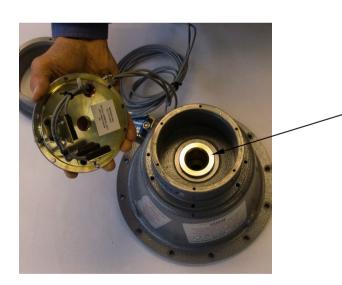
Monitor Unit Cover Removal Thruster shown without spring pack fitted
